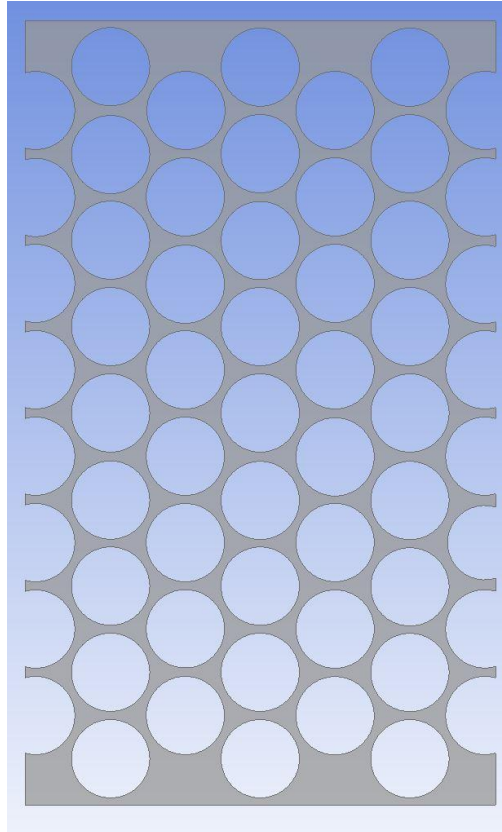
A CAD Drawing of the Grid Used in Experimentation
